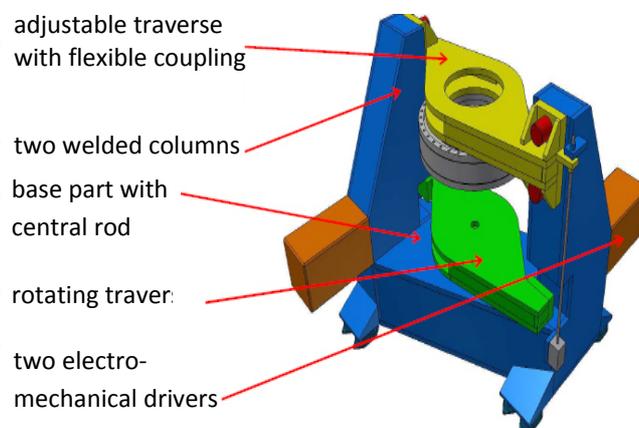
400 kN·m Torque Calibration Machine with its main parts
